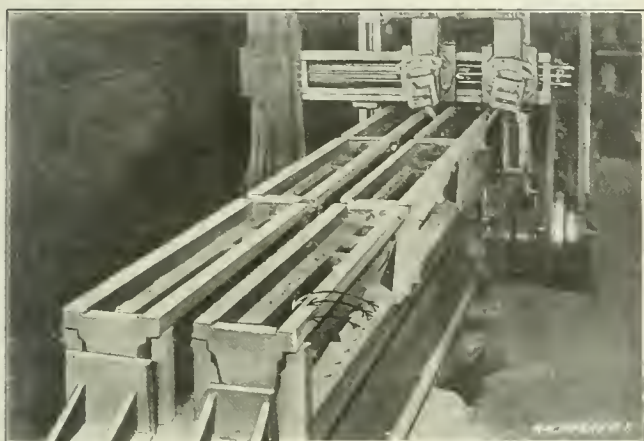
Finishing the Bottom and Sides of Shaper Rams on the Planer
